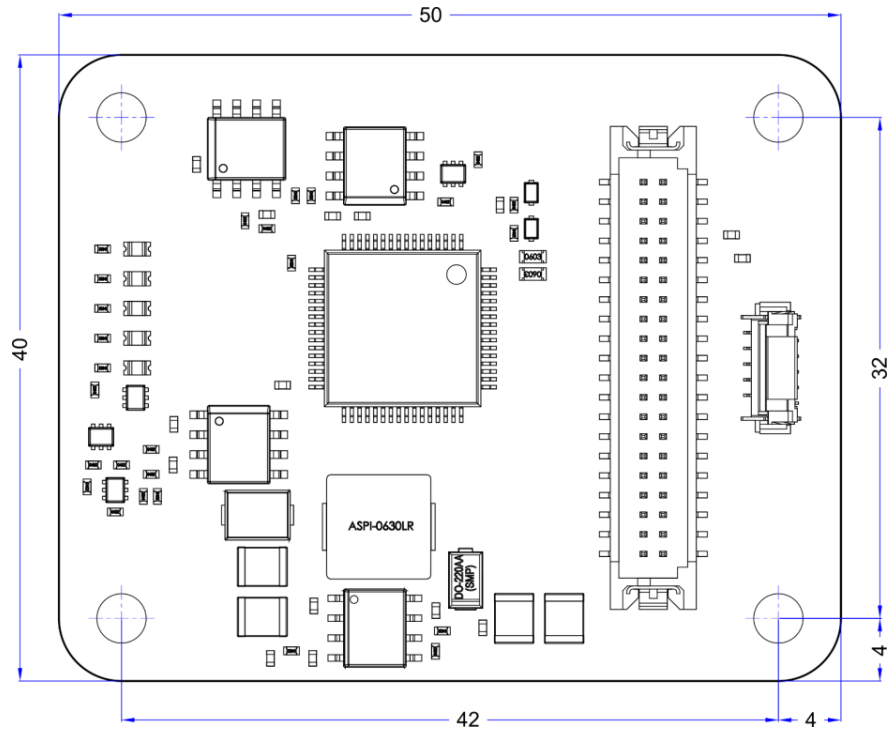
Toradex DSI to LVDS Adapter Dimensions (mm) – side 1, side 1 view
